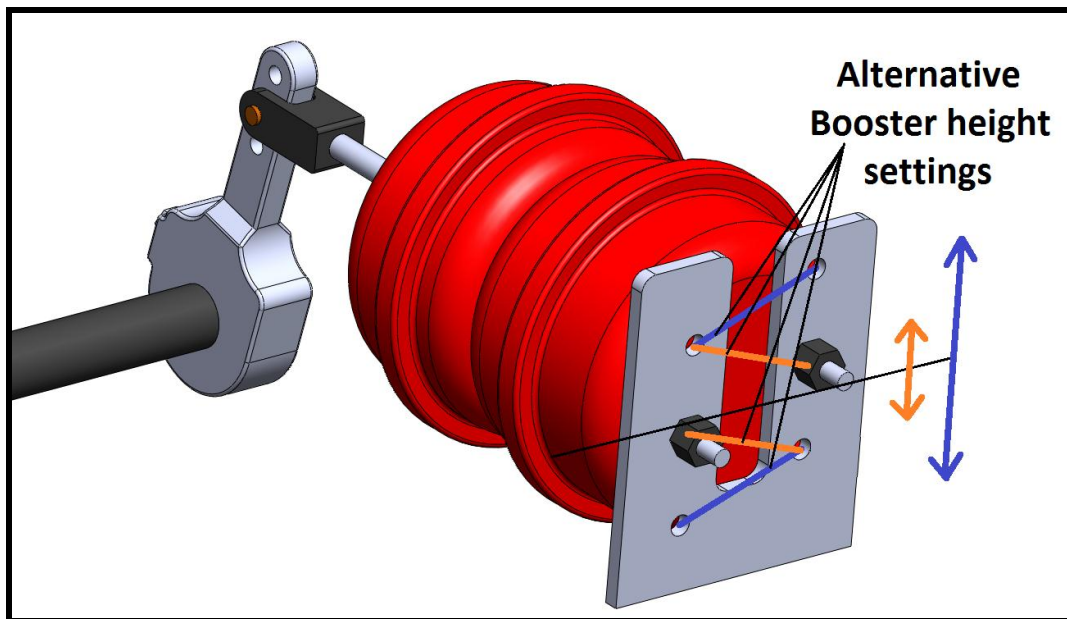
BOOSTER HEIGHT ADJUSTMENT HOLES
